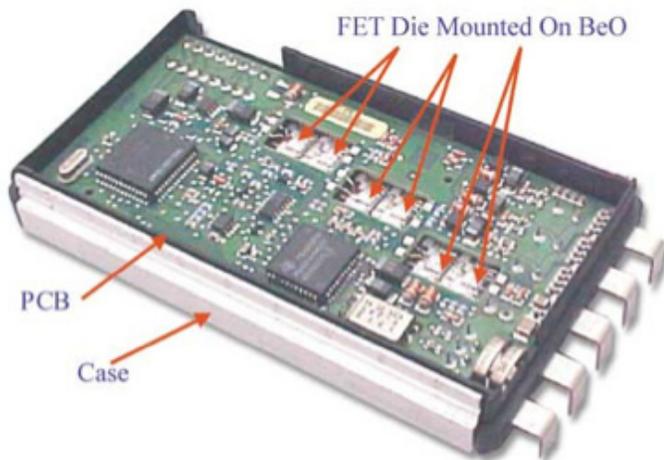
Immersion Cooling of A Controller for An Electro-Hydraulic Steering Motor [3]
